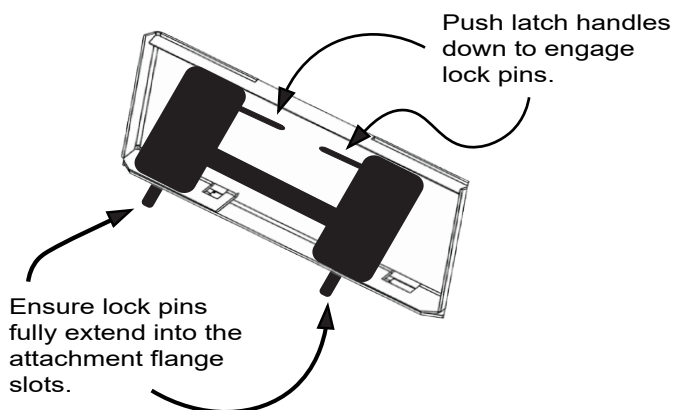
B QUICK ATTACH COUPLER LOCKED TO ATTACHMENT BRACKET
